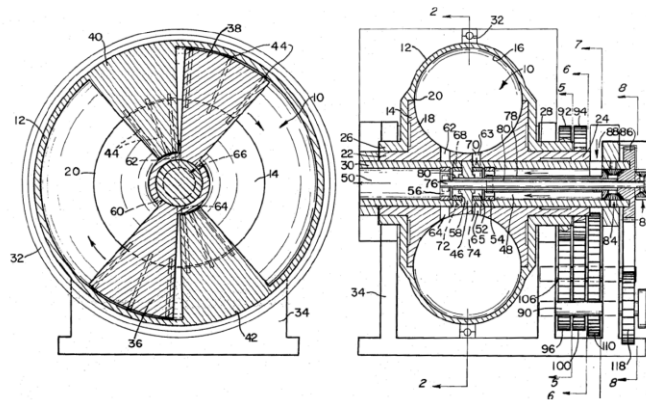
Example of reciprocating toroidal engine with a transmission incorporating one-way clutch mechanisms to a common shaft (58).
